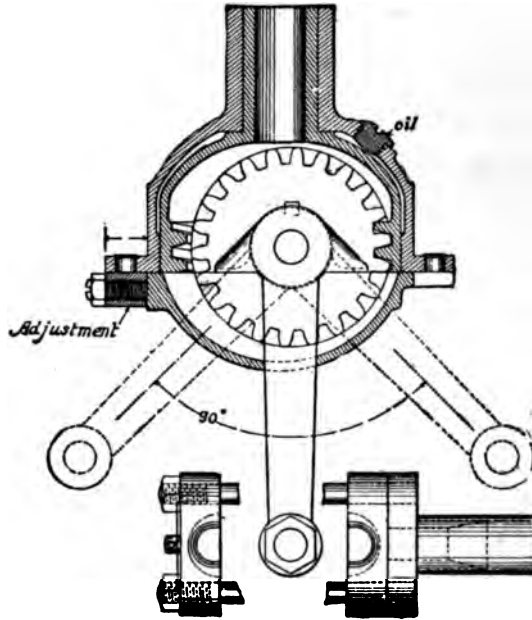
CROSS-SECTION OF BROWN-LIPE BACK-LOCKED STEERING GEAR.
